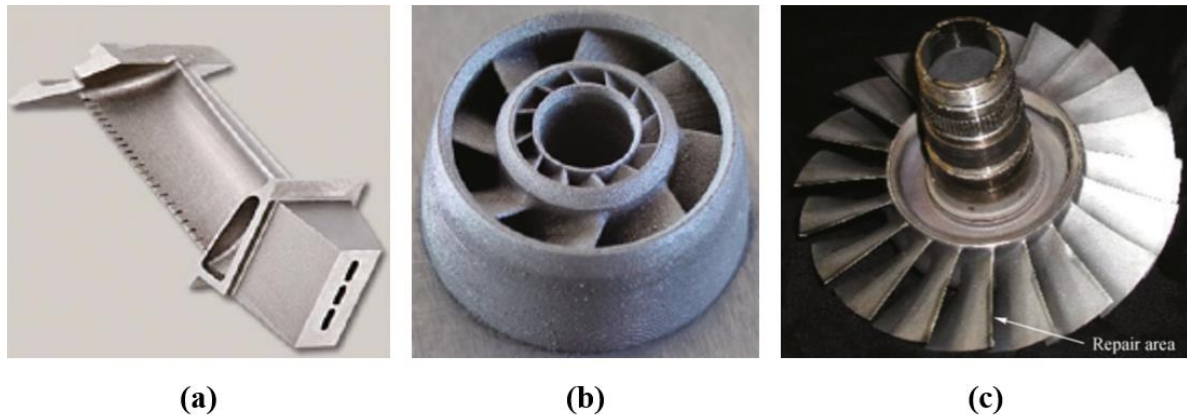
(a) Turbine blade with internal cooling channels produced by SLM (Source: Concept Laser [18]); (b) Hollow static blade casting using the mold and cores fabricated by 3DP (Source: ExOne [19]); (c) Damaged blisk repaired using LENS (Source: Optomec [20]).
